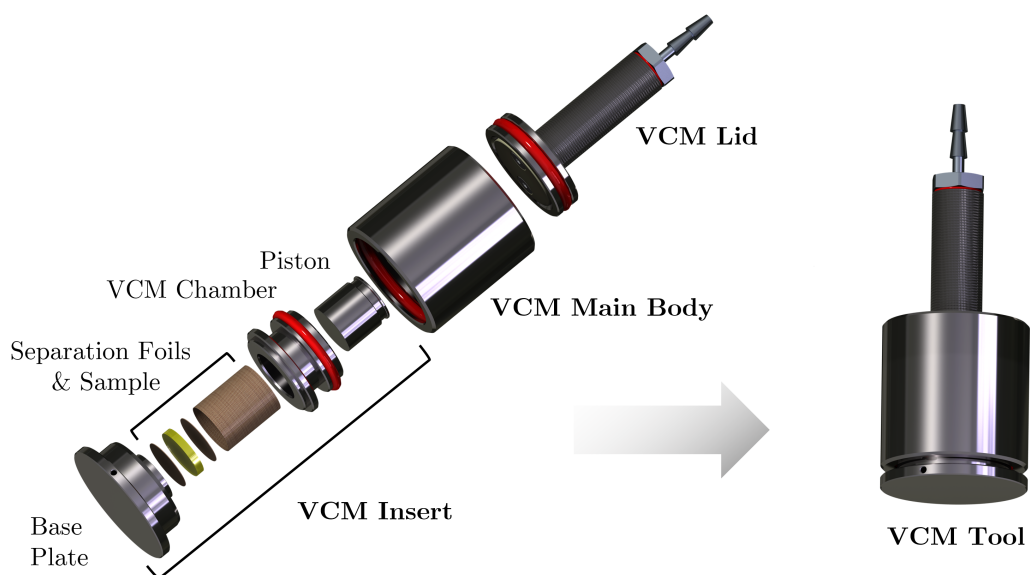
Vacuum Compression Molding (VCM) Disc Tool (MeltPrep GmbH)
